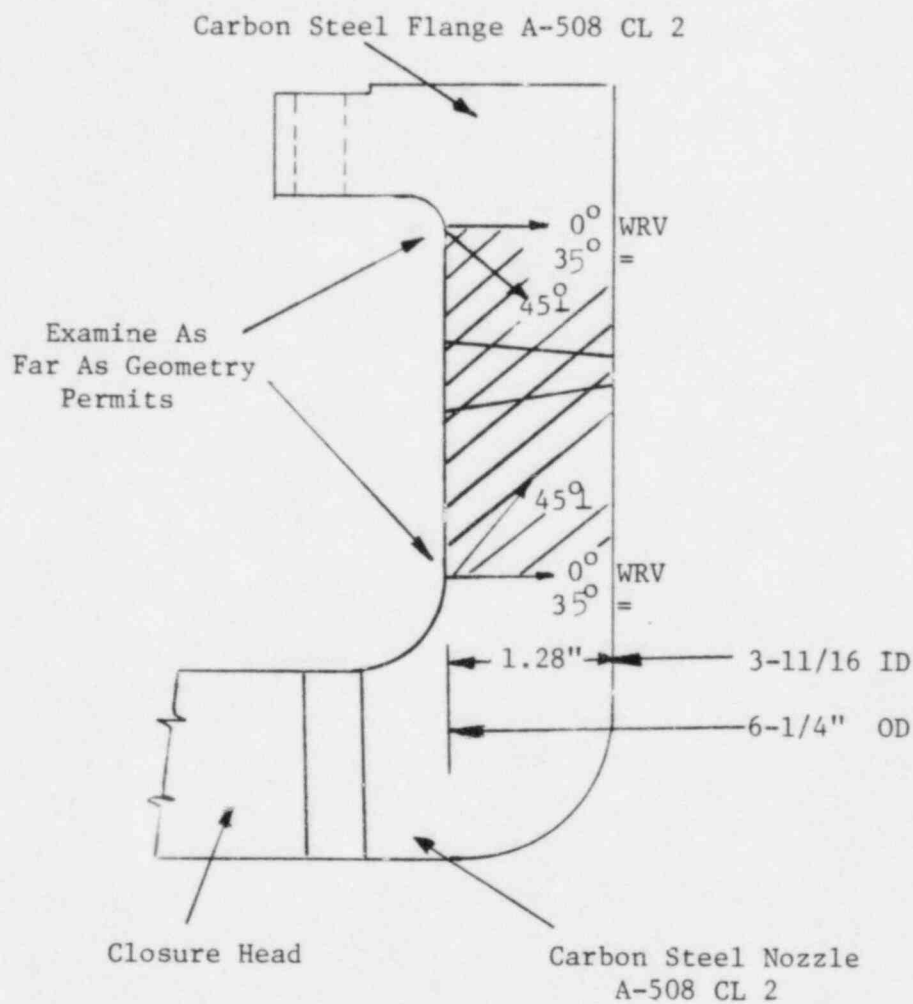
Ultrasonic Examination Procedures for Closure Head Vent (N7) Nozzle to Flange Weld. Cal. Block "VENT"
